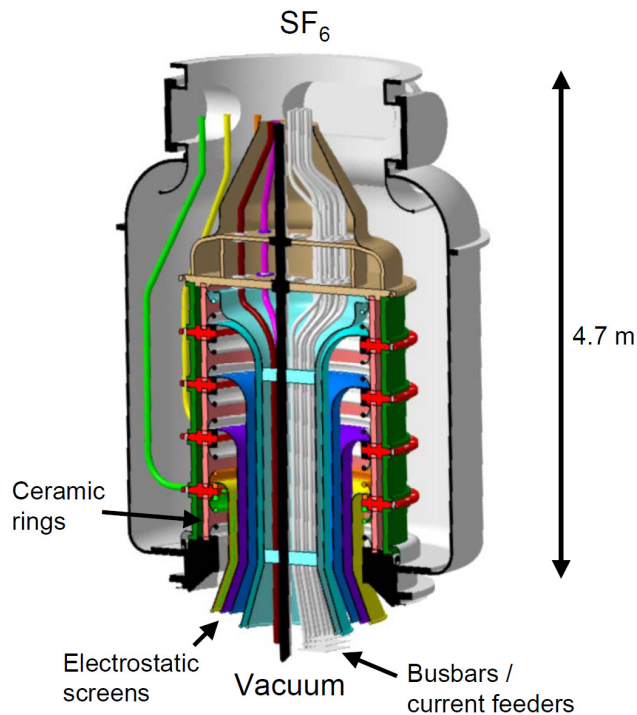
CAD view of the ITER HNB high voltage bushing
